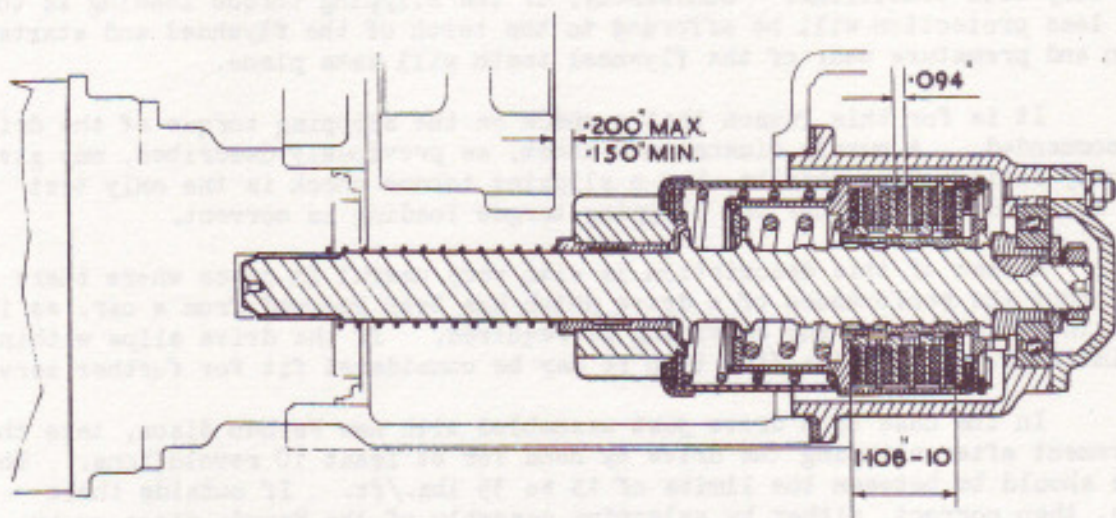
SECTION THROUGH DRIVE IN DISENGAGED POSITION.
